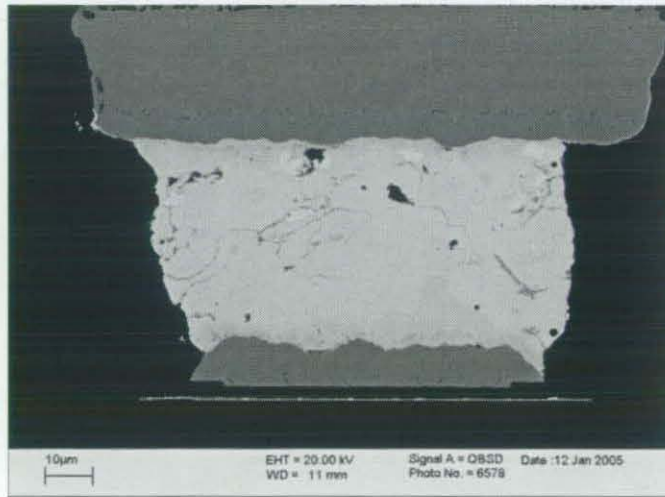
Failure mode of solder joints during thermal cycling when pads with solder mask were used: failure in bulk solder.
